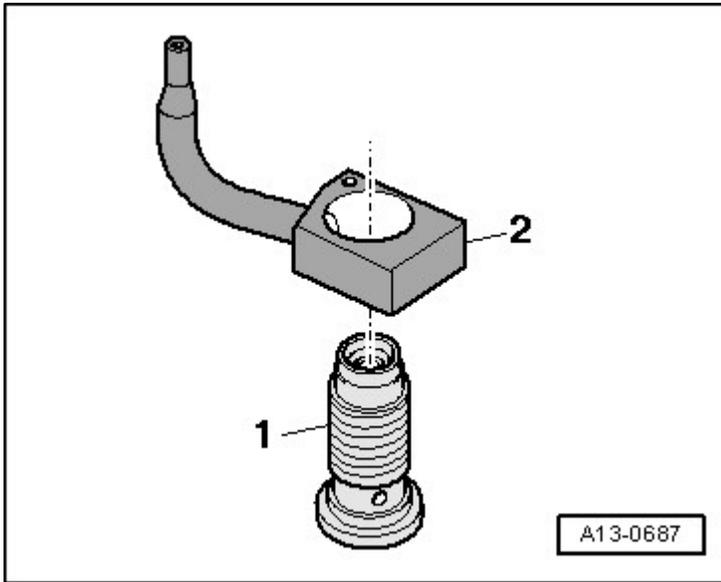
Oil Spray Jet and Pressure Relief Valve
